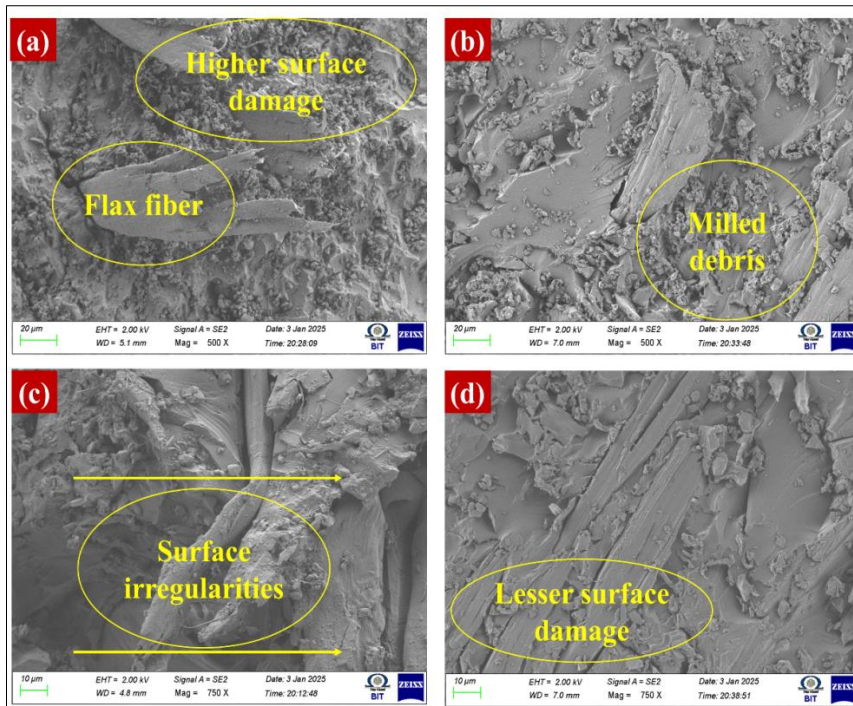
FESEM images of the machined surface of FFRE composites milled under the test conditions: (a, b) feed rate of 70 mm/min, end mill cutter size of 6 mm, spindle speed of 2700 rpm; (c, d) feed rate of 110 mm/min, end mill cutter size of 10 mm and spindle speed of 2700 rpm
